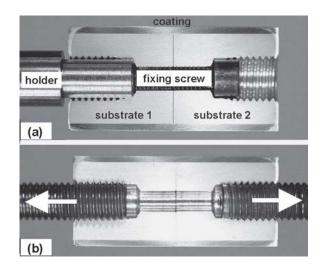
Longitudinal section of a rotation-symmetrical coated TCT specimen (a) screwed on a holder and (b) screwed for testing in a tensile machine
